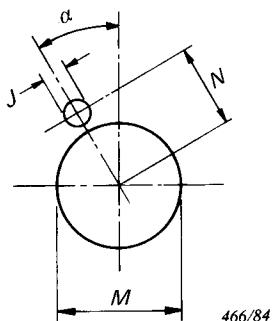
Single-hole bush mounting with panel lug on mounting face (with inch threads).
